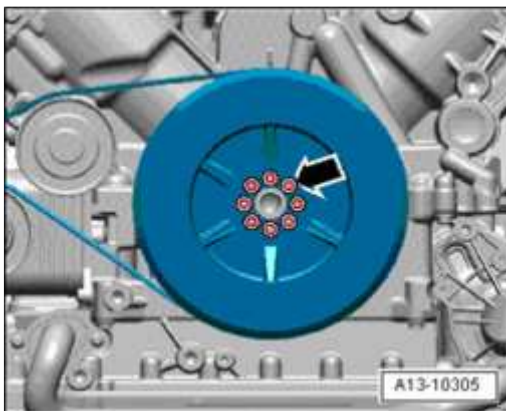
Loosening Mounting Bolts On Vibration Damper
